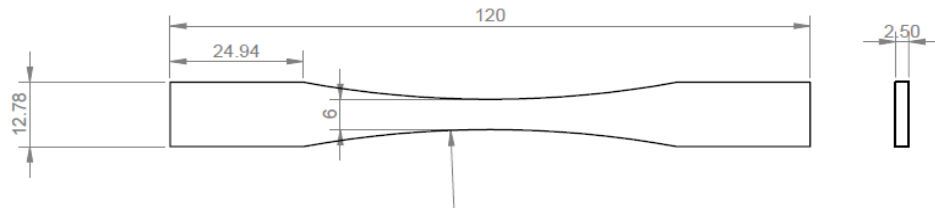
Dimension of fatigue samples built using the default SLM parameters
